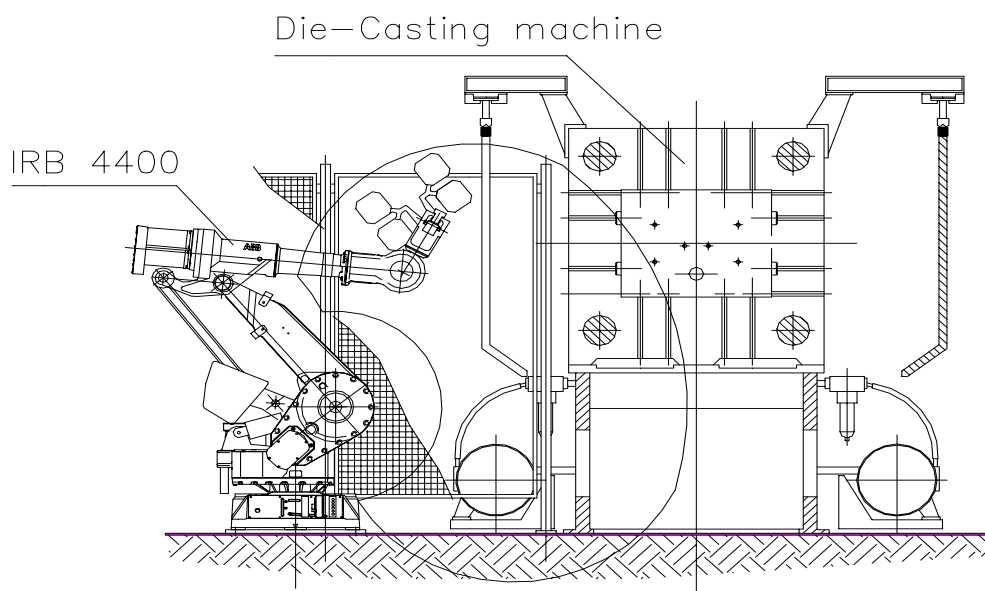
Die-casting machine with a robot using the RobExtractSpray tool system.
